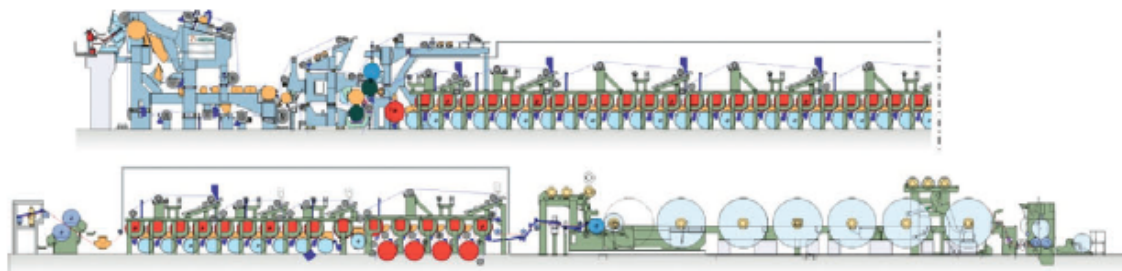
Containerboard machine equipped with a gap former and two-layer headbox; courtesy of Metso Paper Inc. [31]
